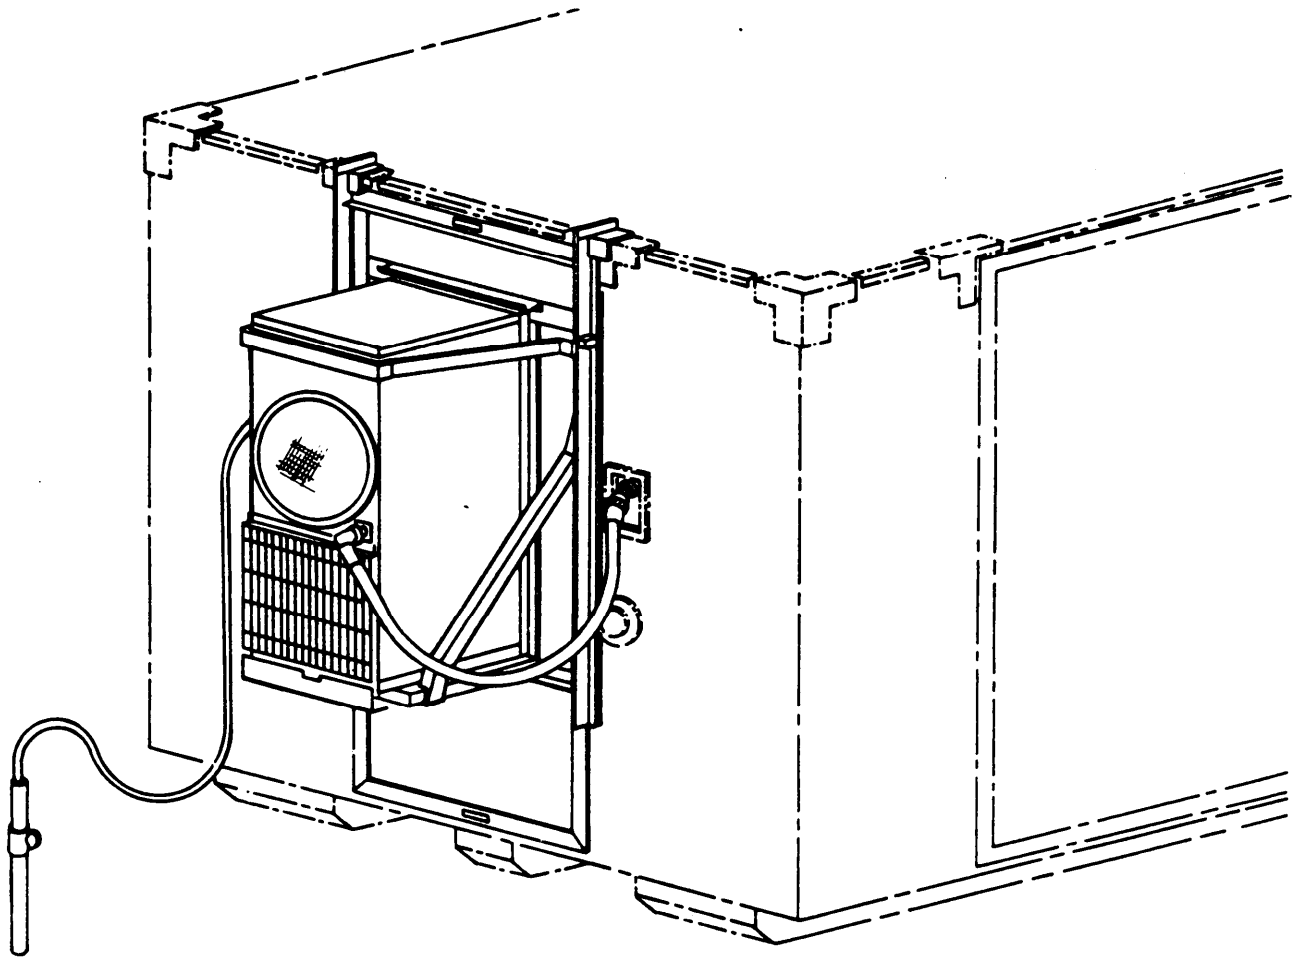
Air Conditioner Mounting Kit MK-001-IU
